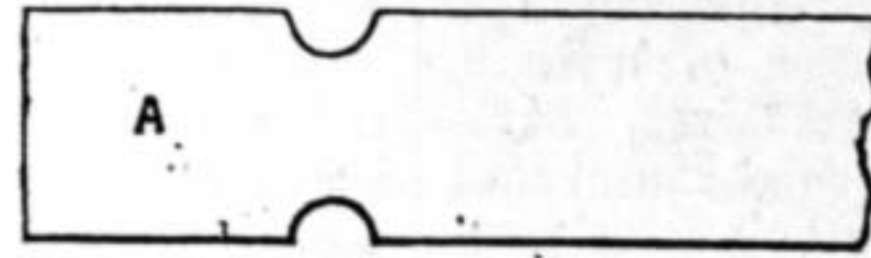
Bar nicked with Top and Bottom Fullers.
